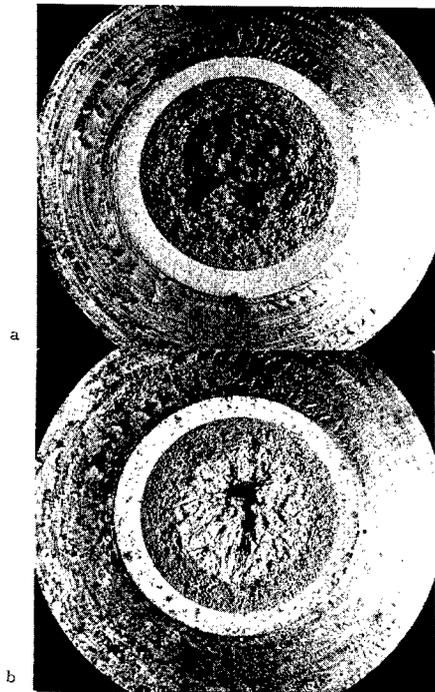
The fracture surfaces developed in 1-inch-diameter fatigue-cracked 4340 steel specimens: (a) fully fibrous fracture and (b) 50% fibrous, 50% crystalline fracture
